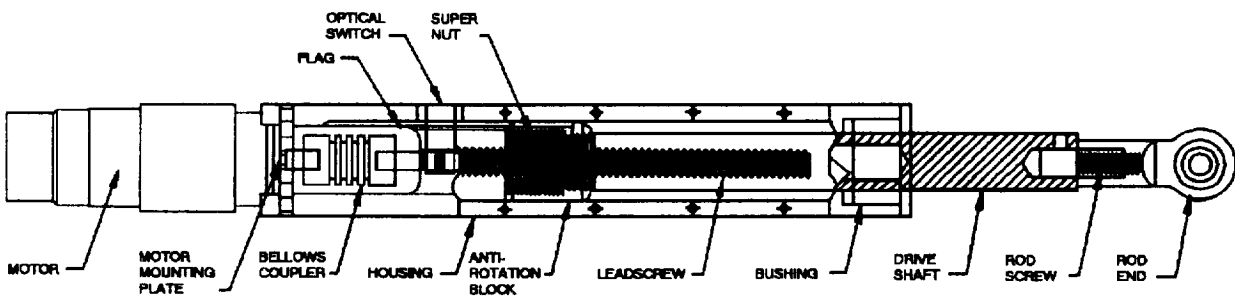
1-Axis Production Ready (Phase III) Motor Drive Assembly
